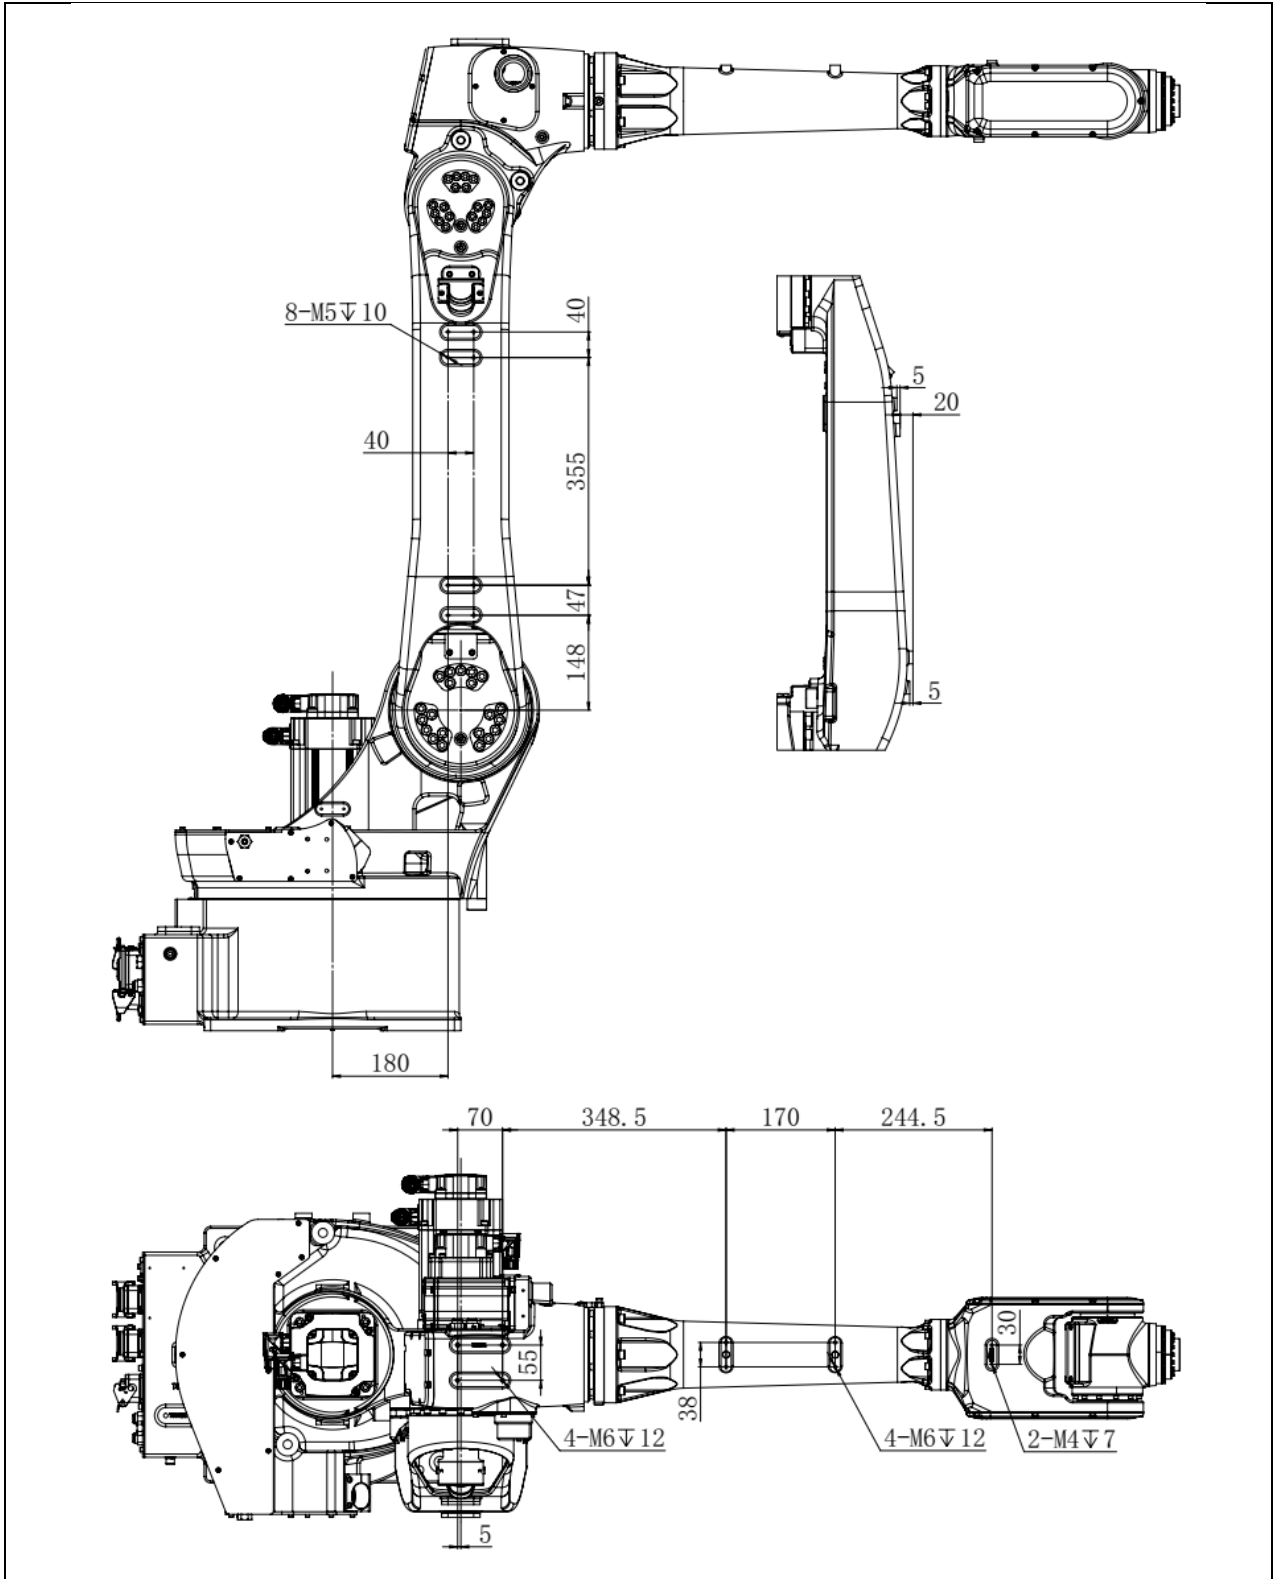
Equipment mounting face (ER20B/10-2010-HI)
